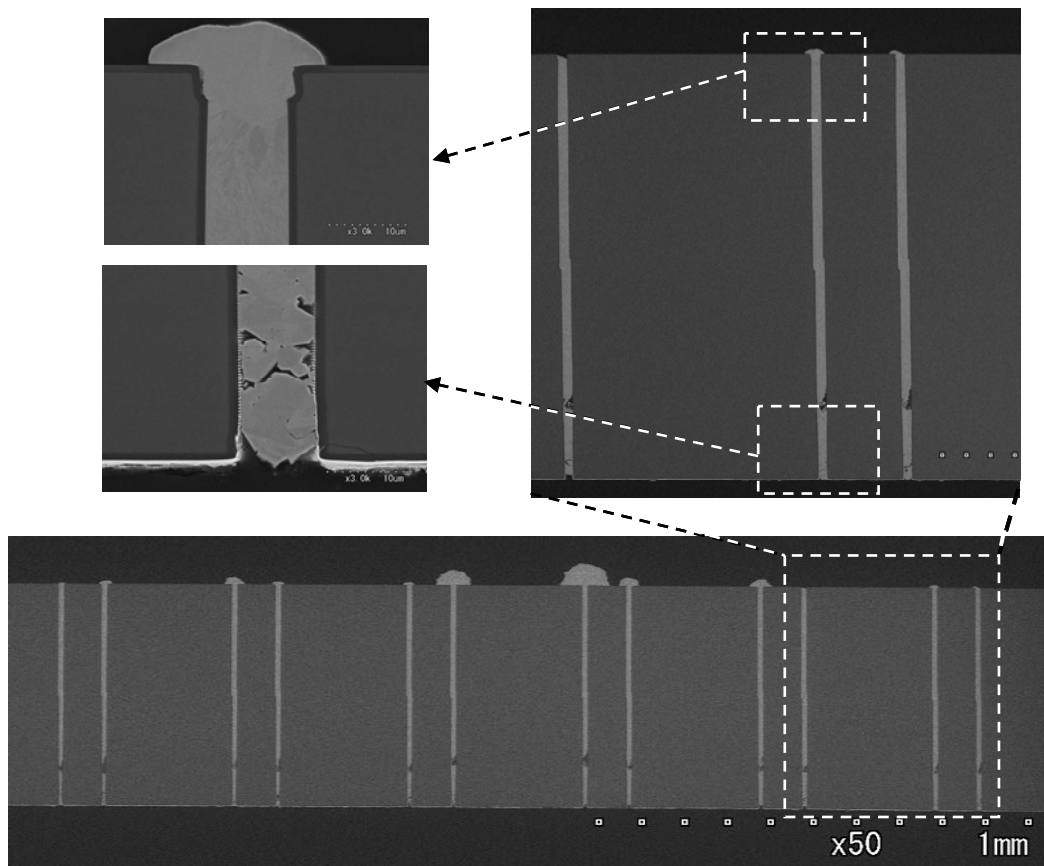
Cross-sectional views of bottom-up plated through-hole interconnections with a 0.25- μm -thick Au seed layer.
